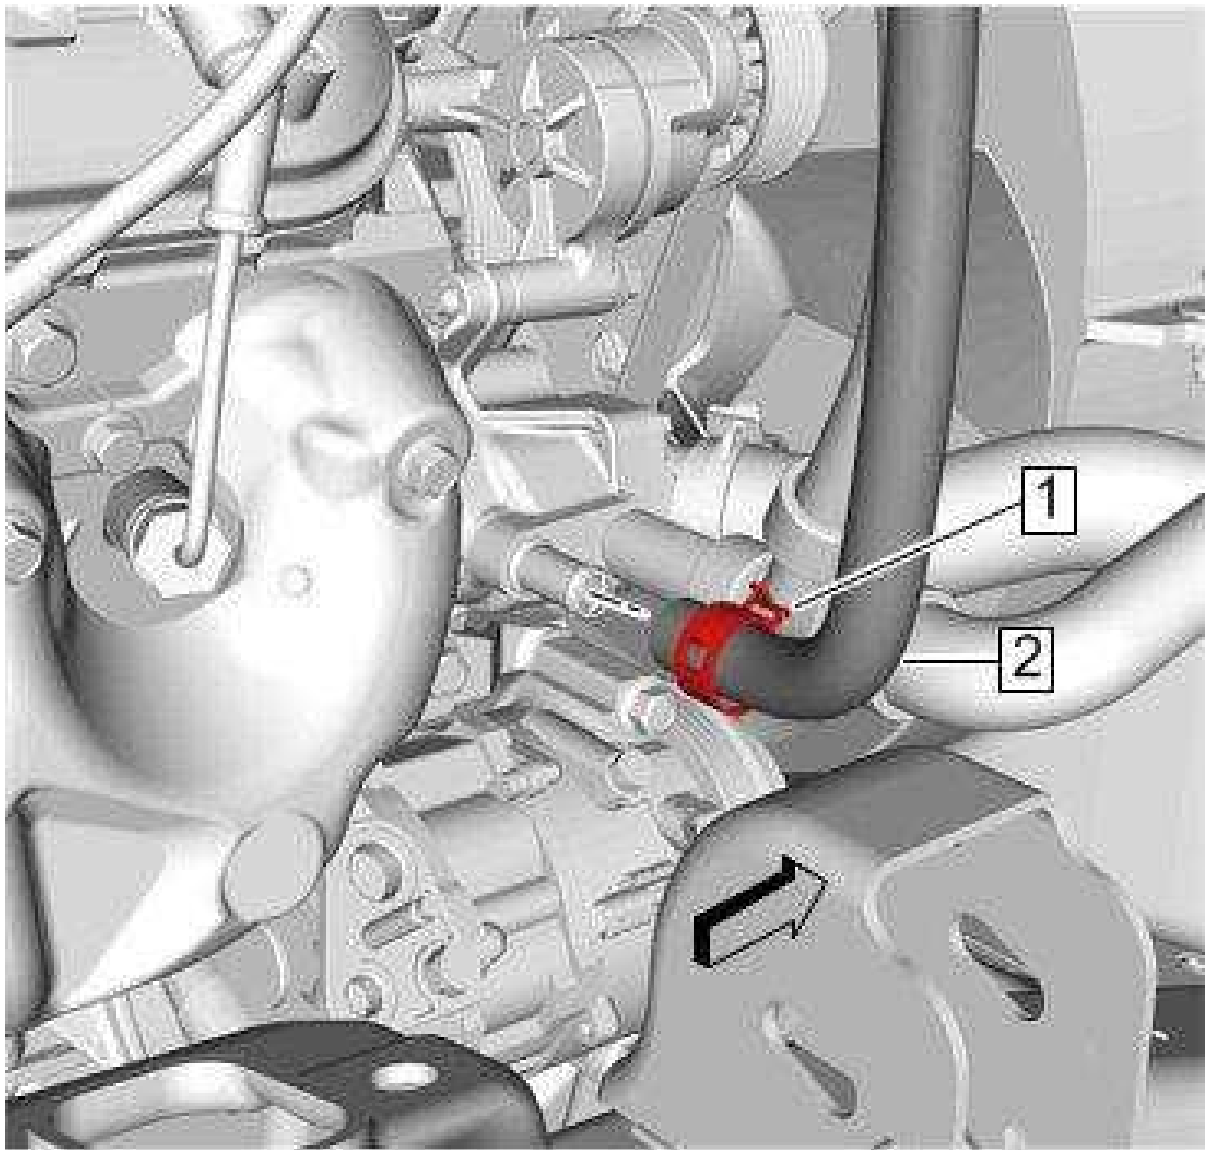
Heater Outlet Hose Clamp To Water Pump
